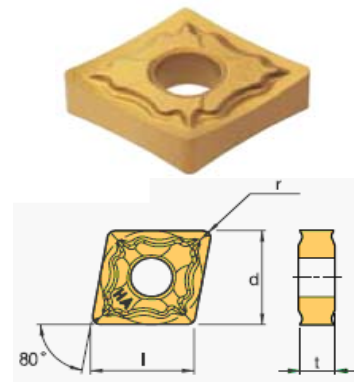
Coated carbide tool insert. $l = 12.9$ mm; $d = 12.7$ mm; $t = 4.76$ mm and $r = 0.8$ mm.
